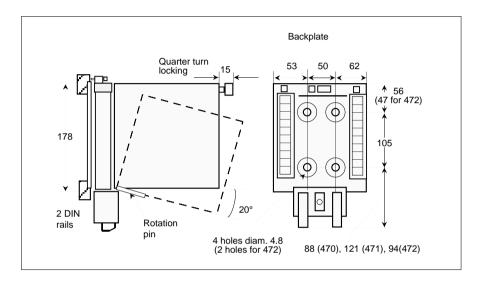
Dimensions for attachment to a vertical wall (mm)
